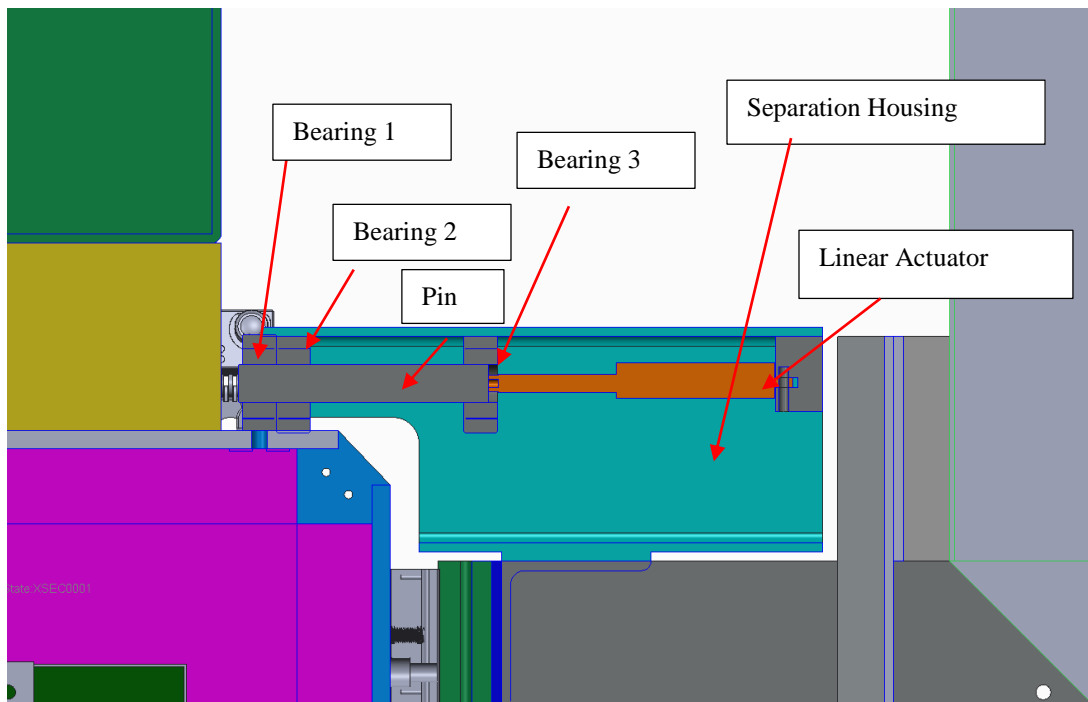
Side and internal view of the single point separation pin and actuator assembly. Bearing 1 is attached to ANGEL, everything else is mounted to the top face of the separation housing.
